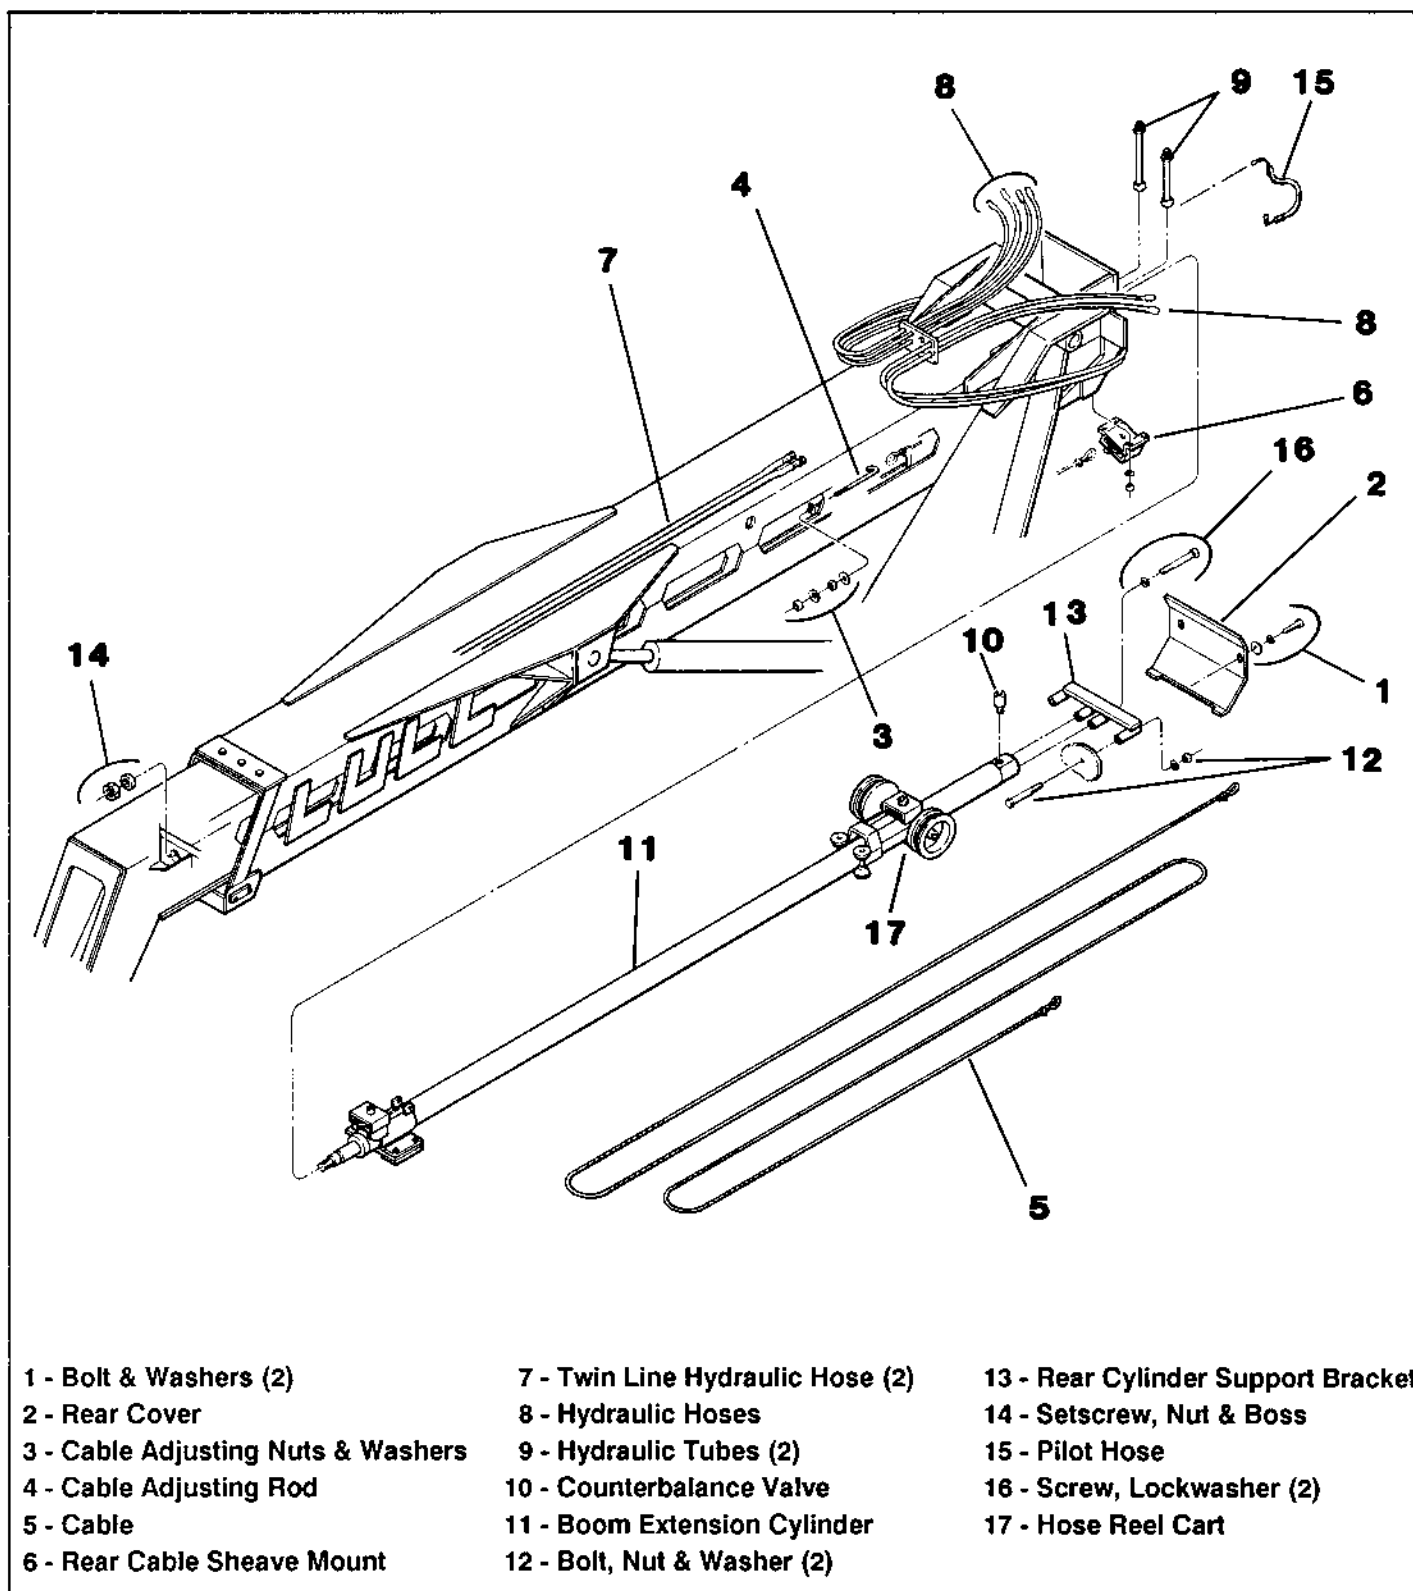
Extension Cylinder Removal (Model 844 Shown)
